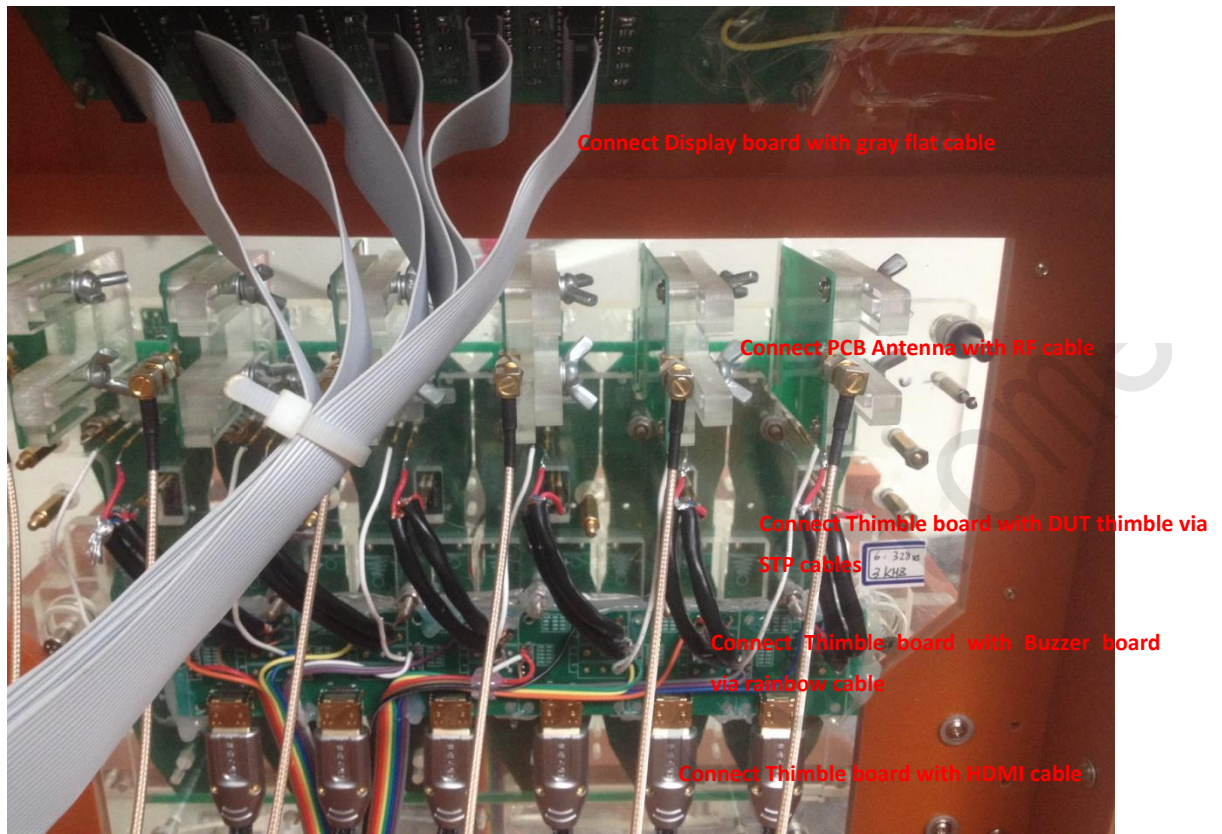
Cable connection of Display, Antenna, Thimble board and DUT thimble
